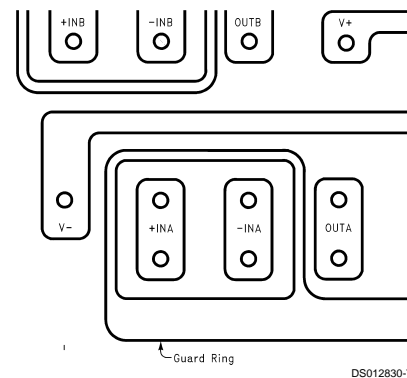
Example, using the LMC6036 of Guard Ring in P.C. Board Layout
